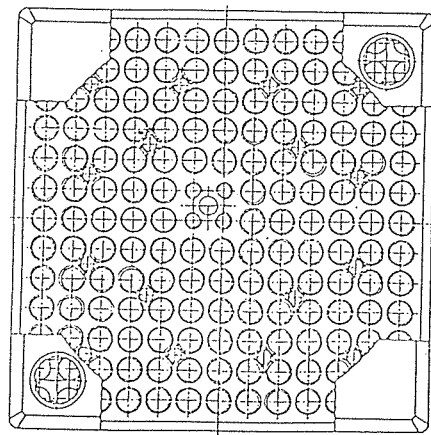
Bottom Nozzle for Typical PWR Fuel Assembly
